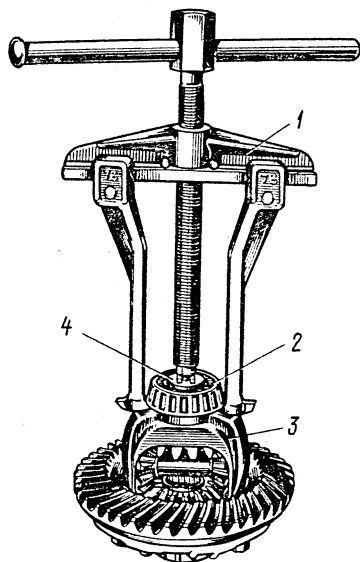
Removing the Inner Race of Differential Pinion Cage Bearing:
